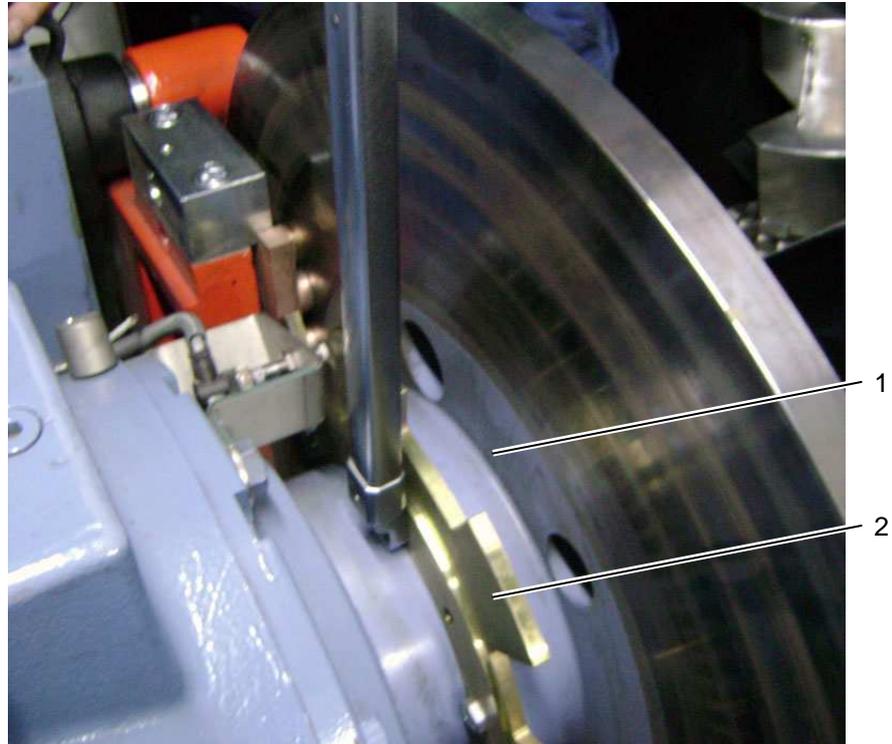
1 Checking the screw connection between the sensor disk and the coupling hub
